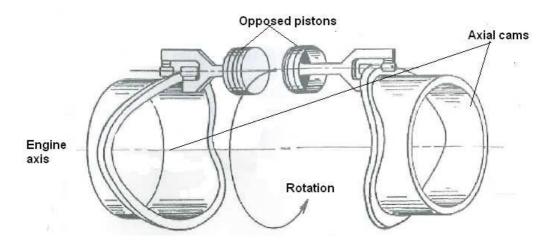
Drawing of an engine with axial cams and opposed pistons
